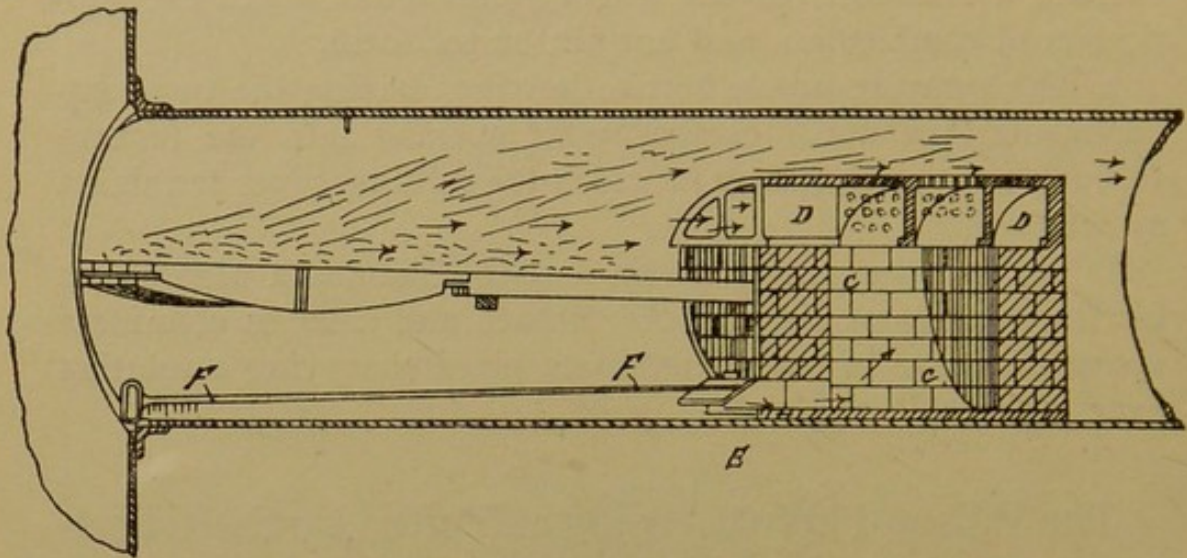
THE GREEN AND HOWE BRIDGE CONSTRUCTION.
